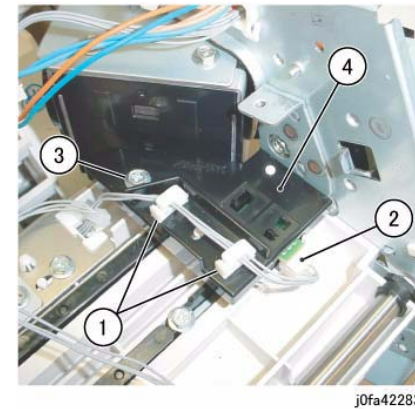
Removing the Rear Tamper Home Sensor Assembly
